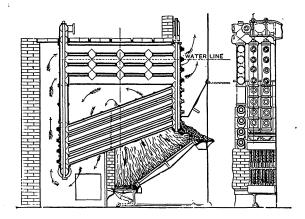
Early Type of Babcock & Wilcox Boiler, with Cast Iron Heating Surfaces.
